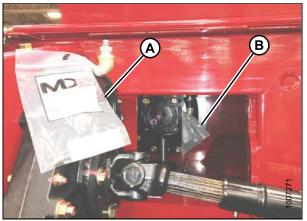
Bevel Gearbox 16 ft Shown, 13 ft Similar
